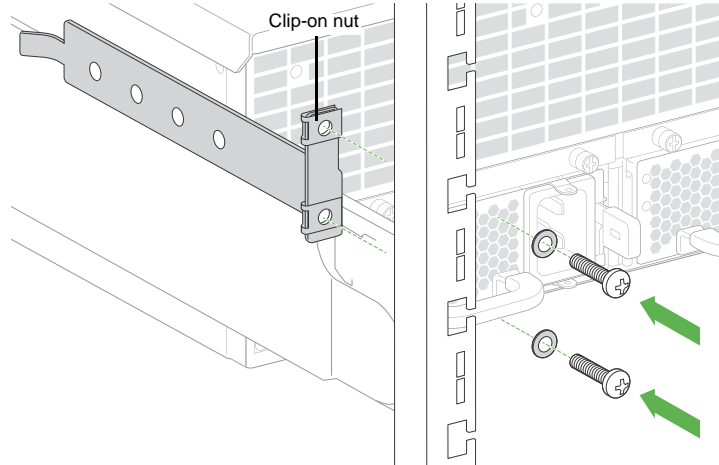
Attaching the Left Rack-Attachment Bracket to Inside of Equipment Rack
